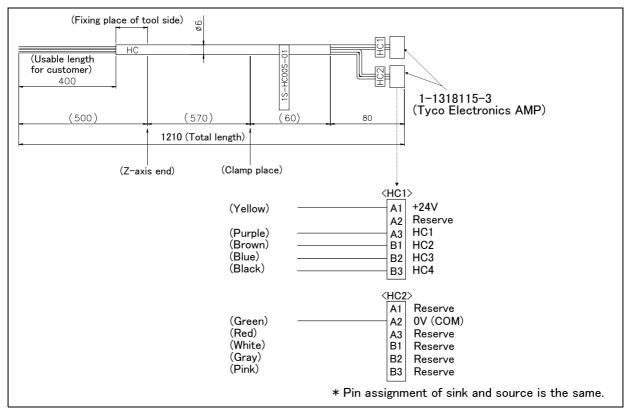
Outside dimensional drawing and pin assignment (RH-3SDHR series)
